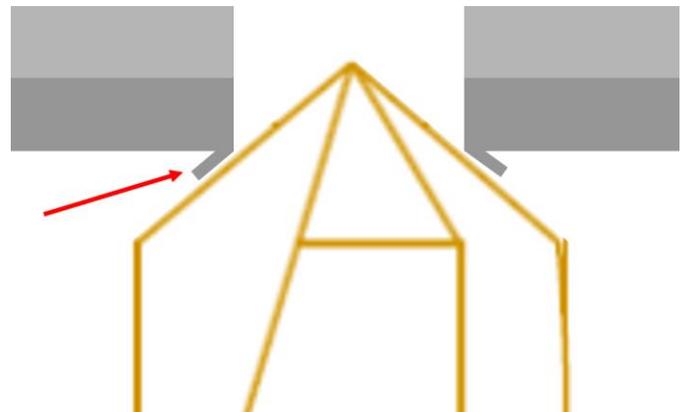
A 100° countersink cutter would sometimes cause exit burrs to fold over, instead of cleanly cutting them.
